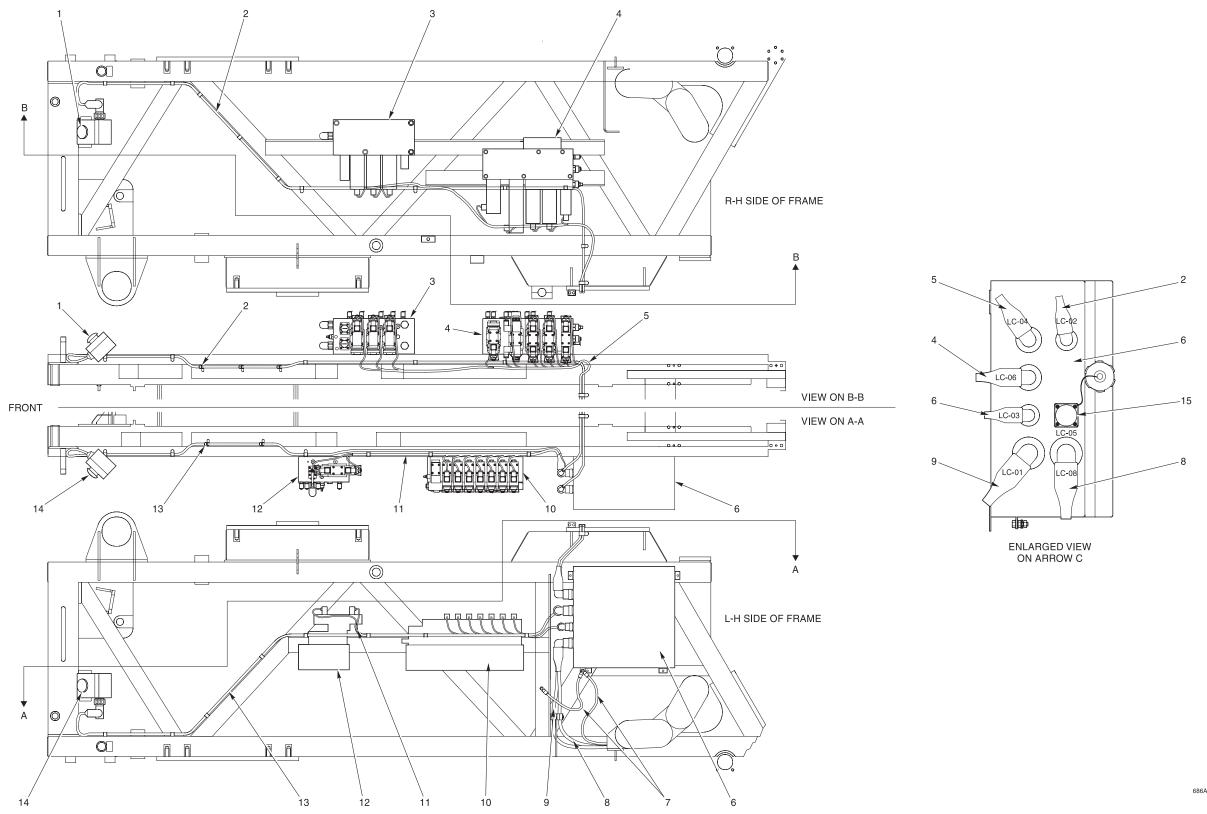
LAUNCH FRAME HYDRAULIC AND ELECTRICAL ASSEMBLY LOCATIONS
